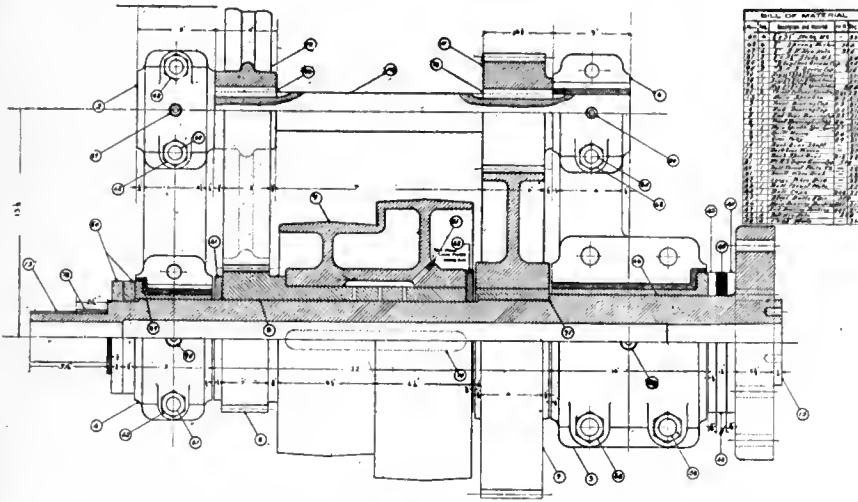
SPINDLE ASSEMBLY, SINGLE PURPOSE LATHE.
